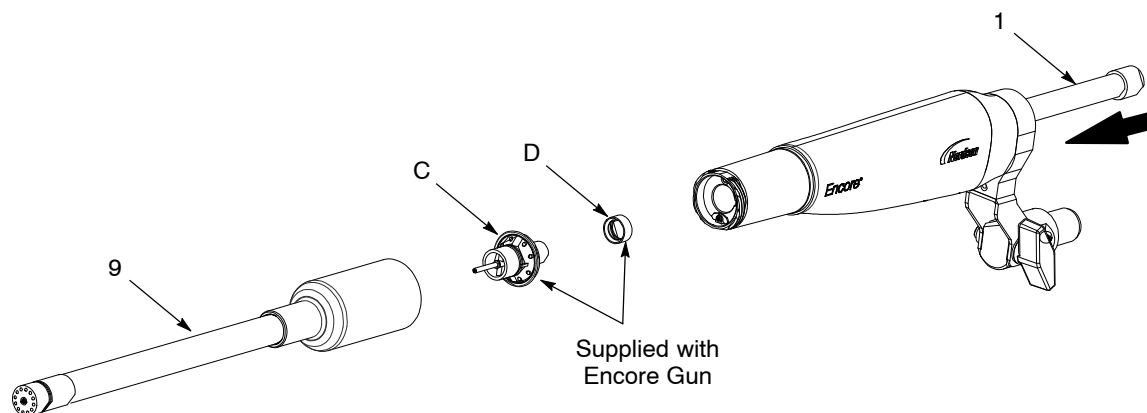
Encore Can Lance Conversion (shown with bar-mount gun)
